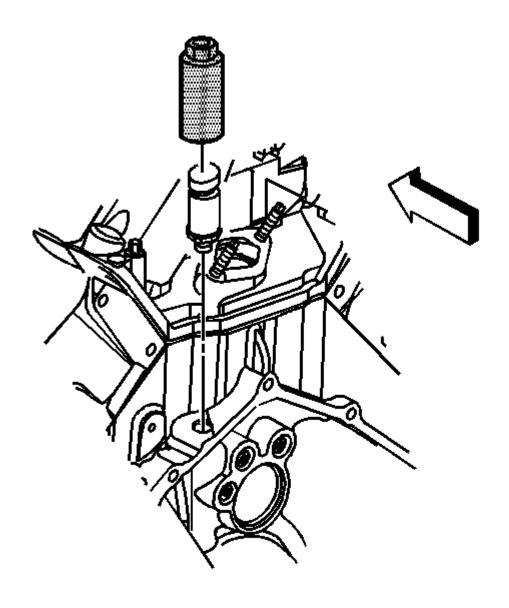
View Of Oil Pressure Sensor & J 41712 Courtesy of GENERAL MOTORS CORP.
